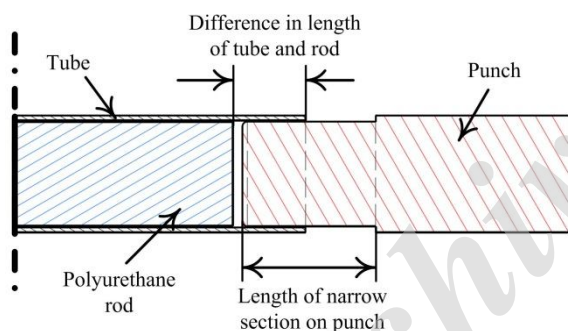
A sectional view of aluminum tube, polyurethane rod and punch in bulging process
